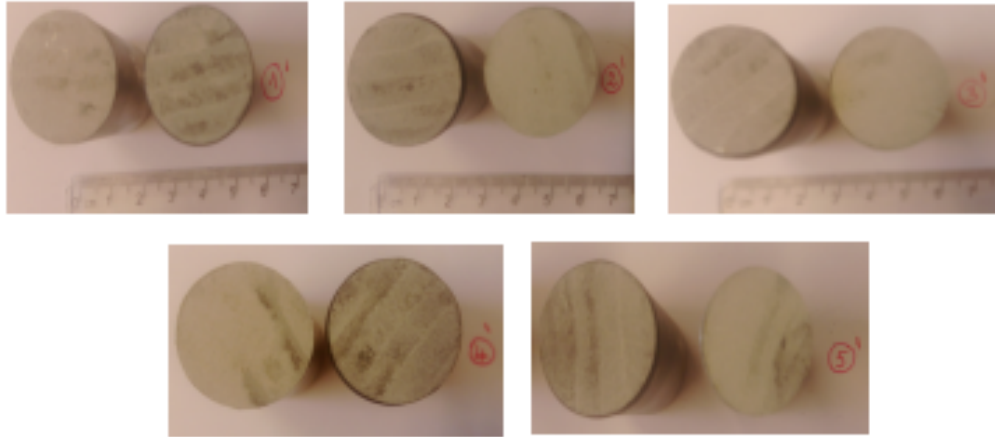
Photographic images of the fracture surfaces of Al-10%PEEK HPCS coatings.
